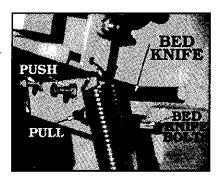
BED KNIFE (24" MODEL SHOWN)
